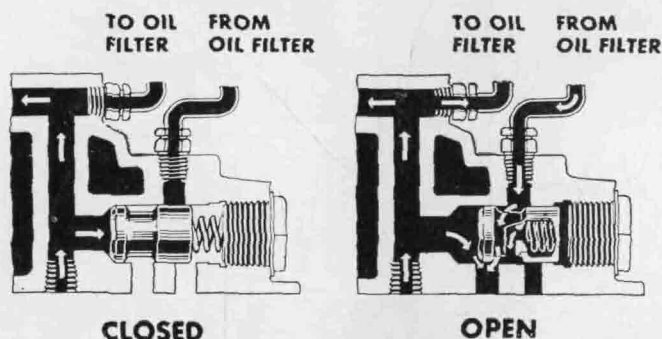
Action of oil-pressure relief valve. With the valve closed, no oil is bypassed through the oil filter. But with the valve opened, oil is bypassed through the oil filter as well as past the valve, and flows back into the oil pan. (Plymouth Division of Chrysler Corporation)
